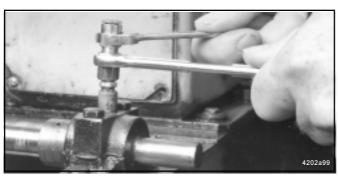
Screwing Quicklinc fitting into the Zerk-Lock body
